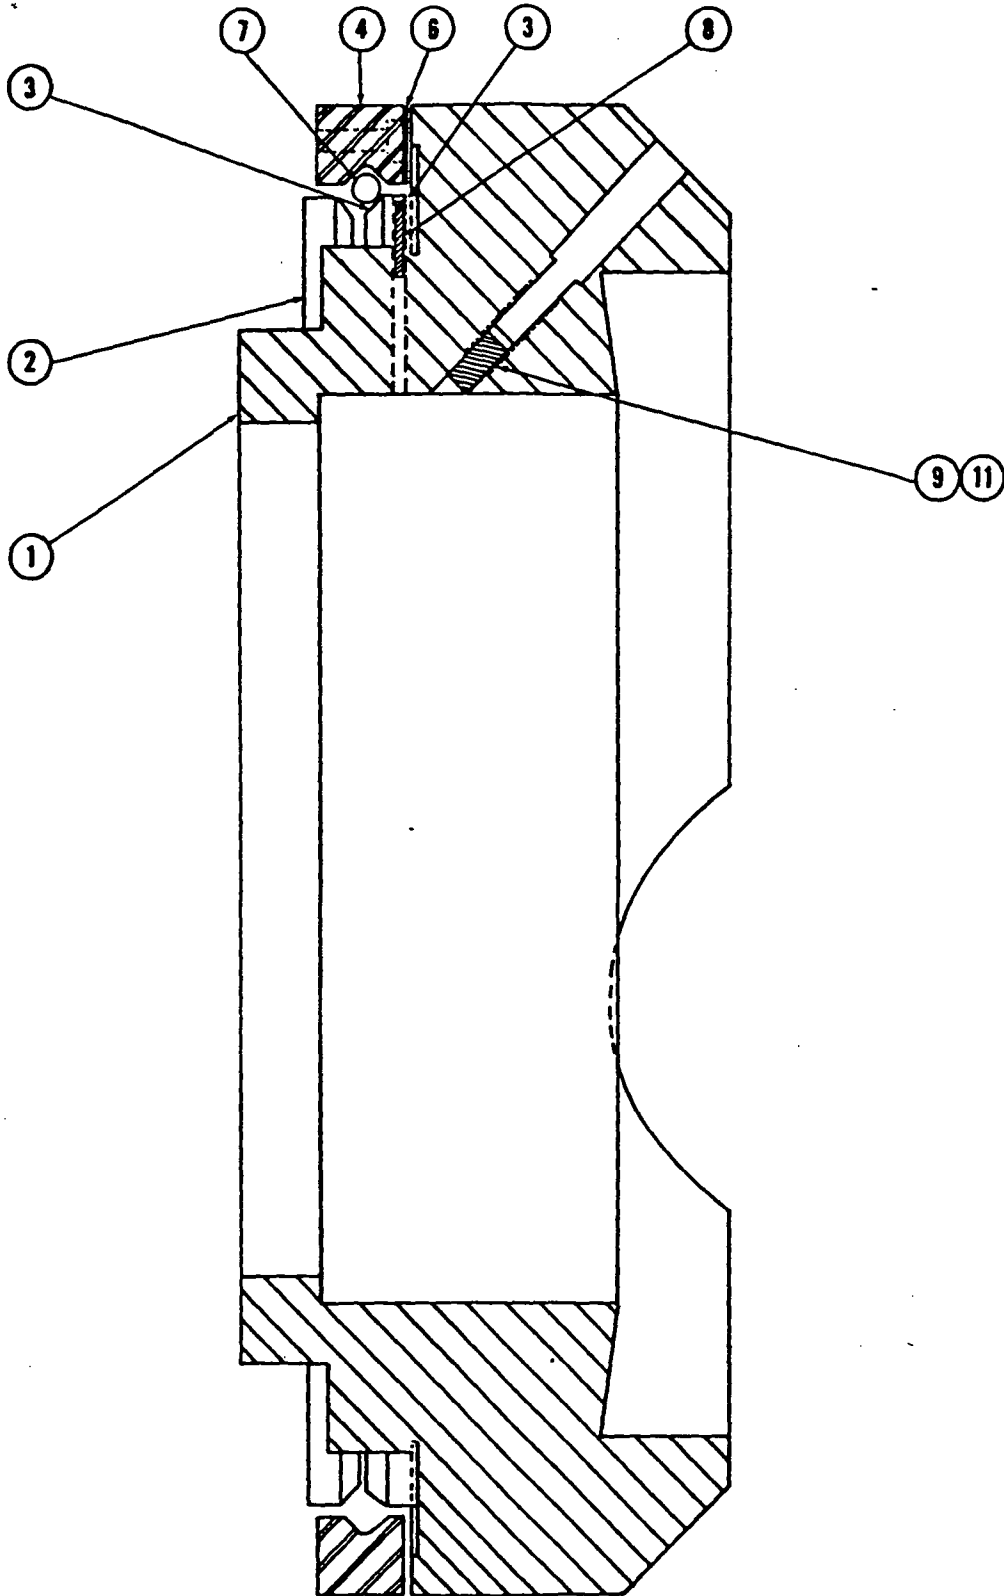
HEAD TO COLLIMATOR BEARING RING
